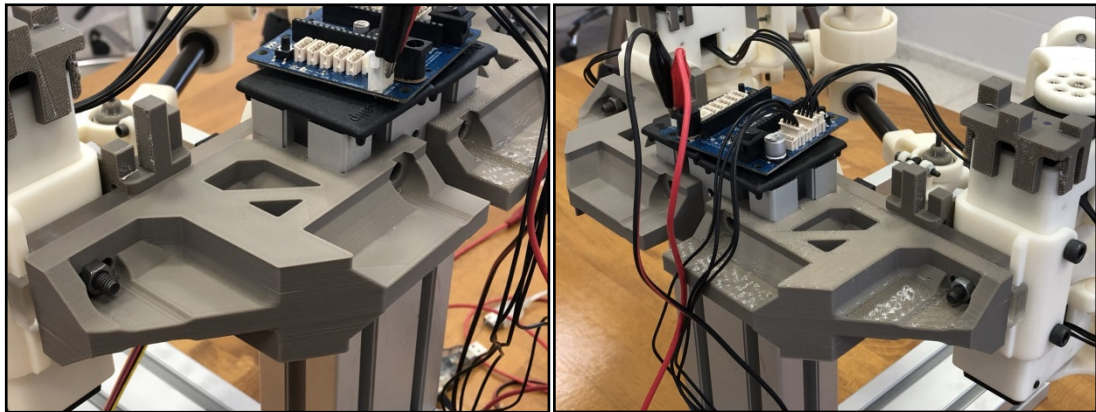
Support parts designed between micro manipulator base and aluminum
